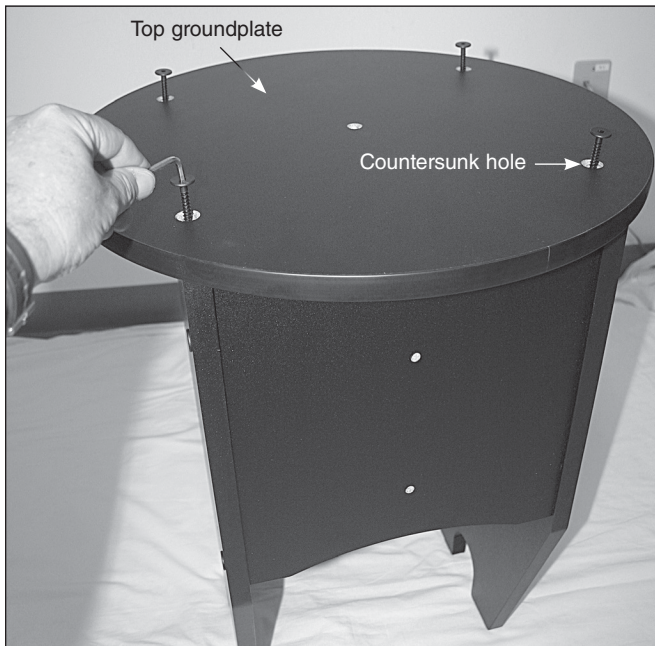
With the front and side panel assembly turned upside down, attach the top groundplate to the assembly with the countersunk holes facing up.
